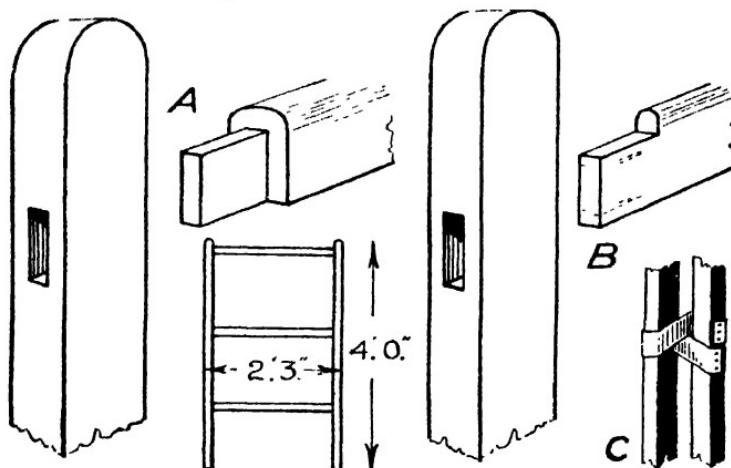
DETAILS OF JOINTS AND SIZES OF CLOTHES-AIRER
